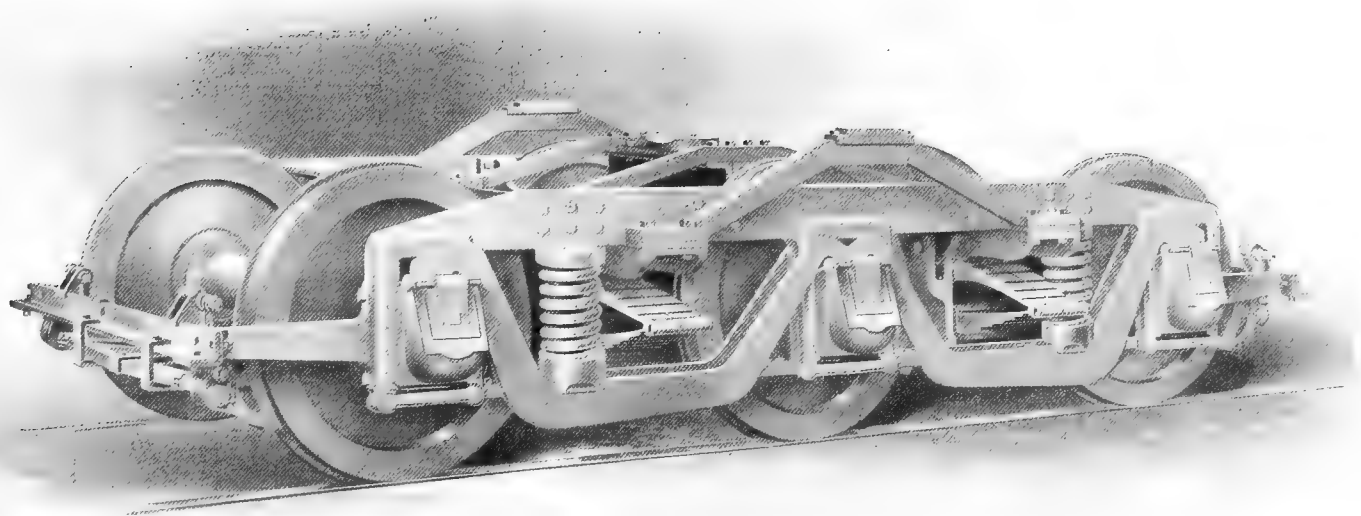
Six-Wheel Truck with Side Frame and Pedestals Forged in One Piece. J. G. Brill Company.
